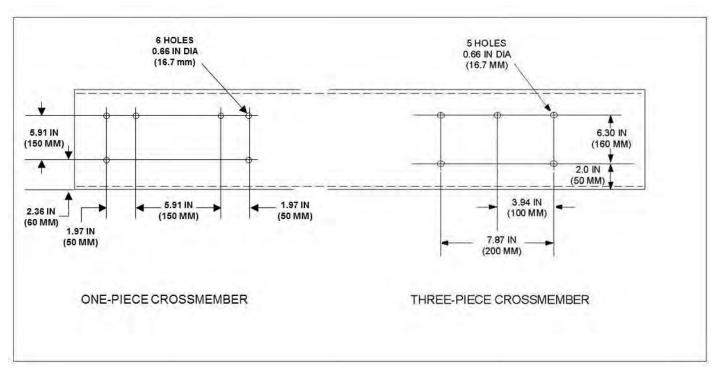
Crossmember Gusset Hole Patterns (Additional Holes Available in 50 mm Horizontal Increments)
